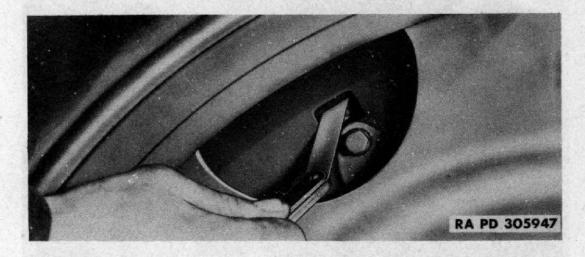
Measuring Brake Clearance with Gage 41-G-400
